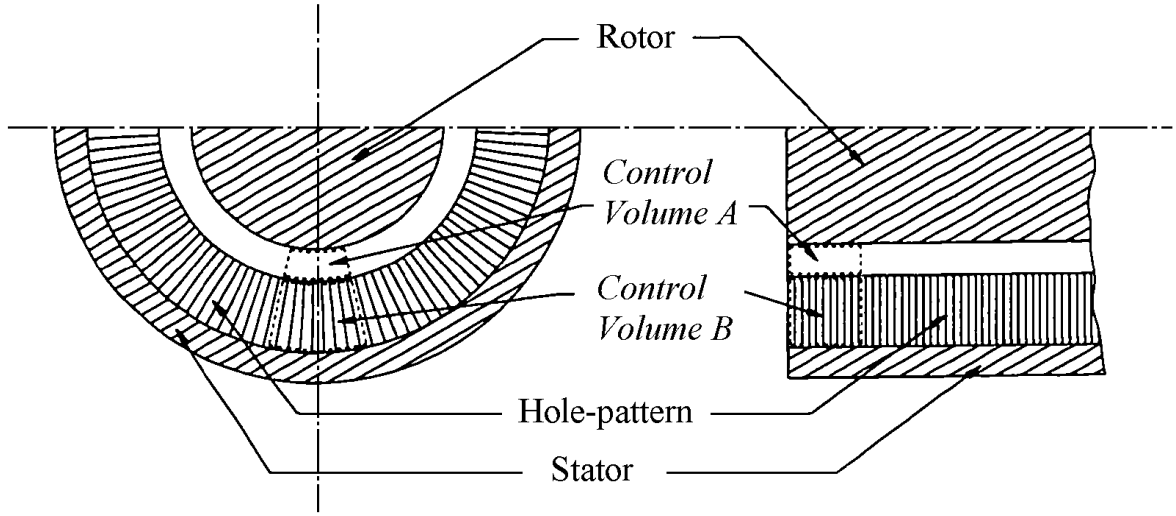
Cross-sectional view of hole-pattern seal/smooth rotor
